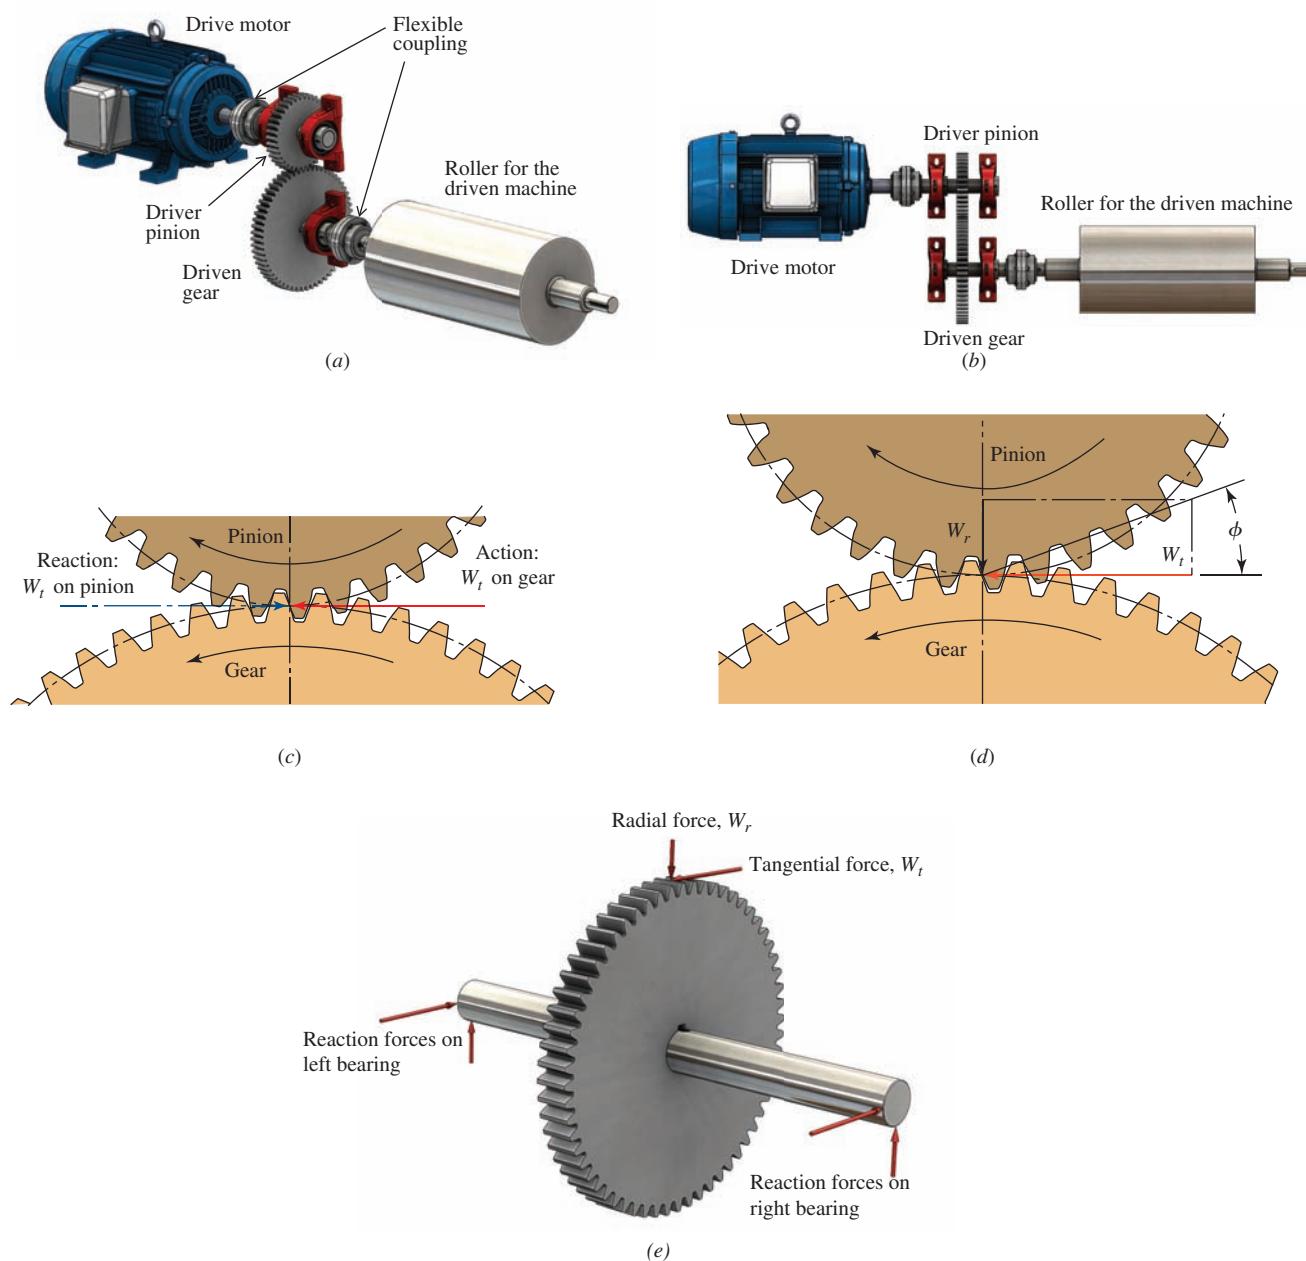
(a) Power flow through a gear pair (b) Side view of drive train (c) View of gear teeth in mesh showing tangential forces on both gears (d) Tangential and radial forces exerted by the pinion tooth on the gear tooth (e) Forces on the shaft carrying the driven gear
